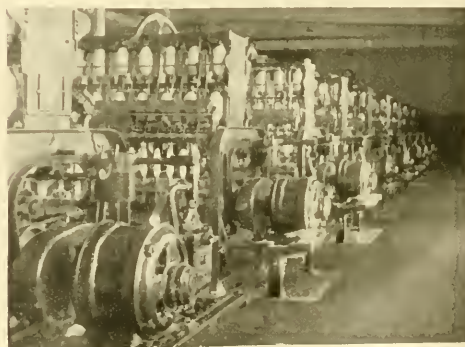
MOTOR DRIVEN SPINNING FRAMES
